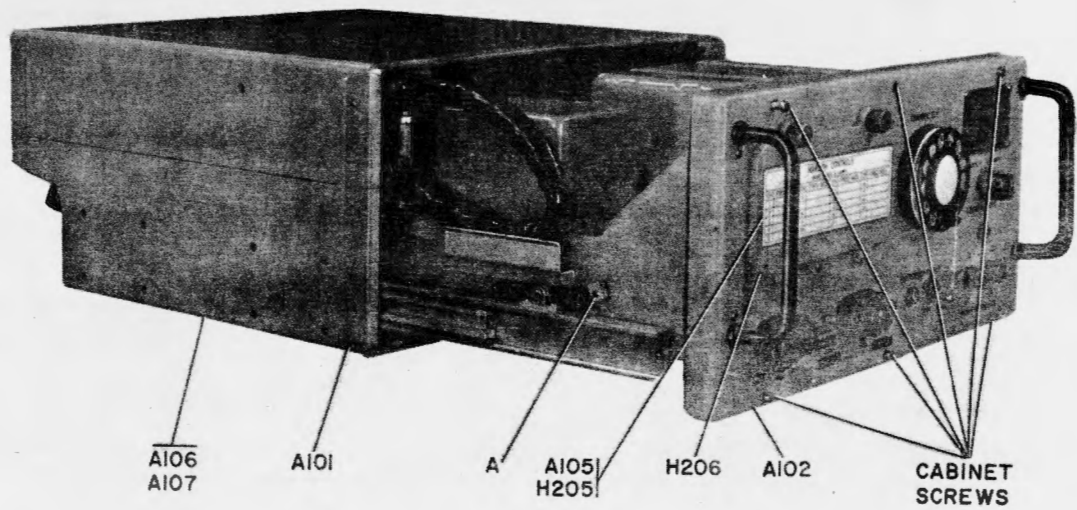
Radio Set Control C-3866/SRC, Removal of Chassis
